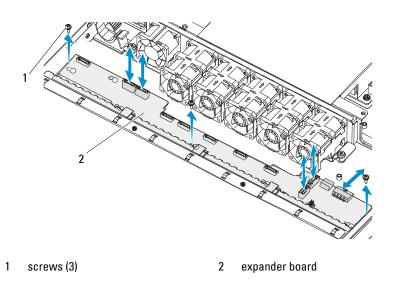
Removing and Installing the Expander Board–3.5-Inch Hard-Drive System
